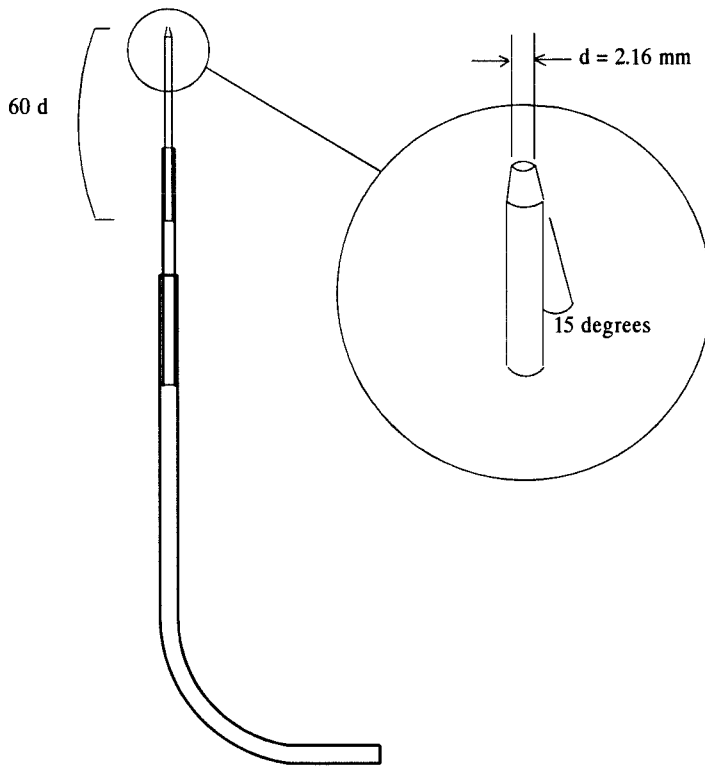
Design of the 2.16 mm nozzle. Brass tubes with outer diameters of 9.5 mm, 6.4 mm, and 3.2 mm are soldered together as shown, reaching a final inner diameter of 2.16 mm.
